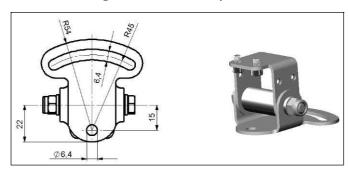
Mounting base, stainless steel, adjustable in 2 axes [Part No.: 107ACPIMB]
